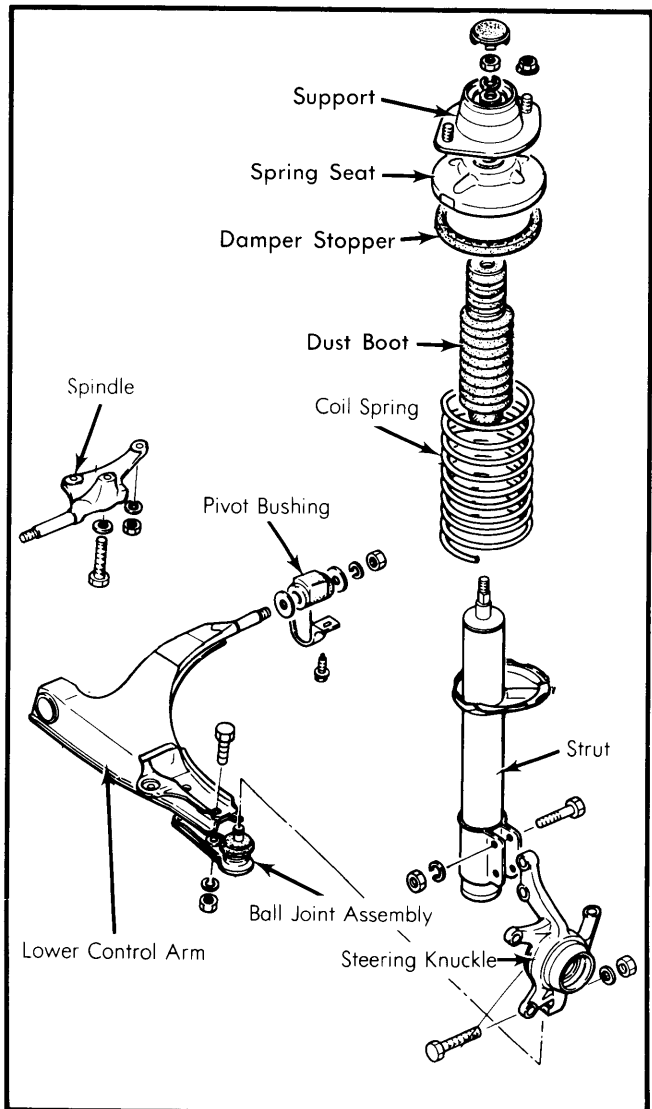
Exploded View of GLC Front Suspension (FWD Models)
